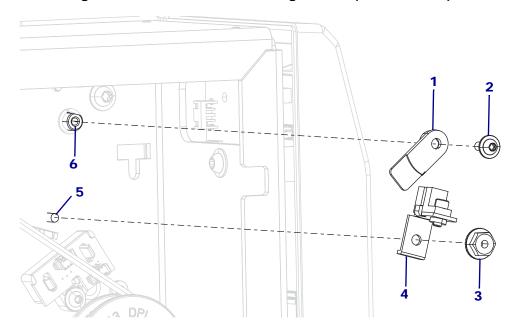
• Remove the Mounting Screws (ZT610 shown)
